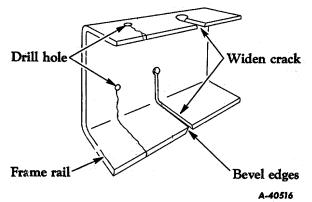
Showing Method of Drilling Frame Rail to Stop Progress of Crack. Also shows Method of Preparing Crack for Welding.
